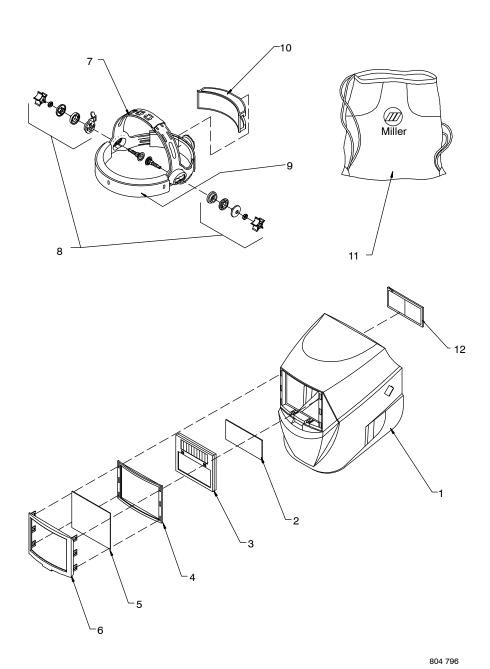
Pro-Hobby Series Auto-Darkening Welding Helmet
